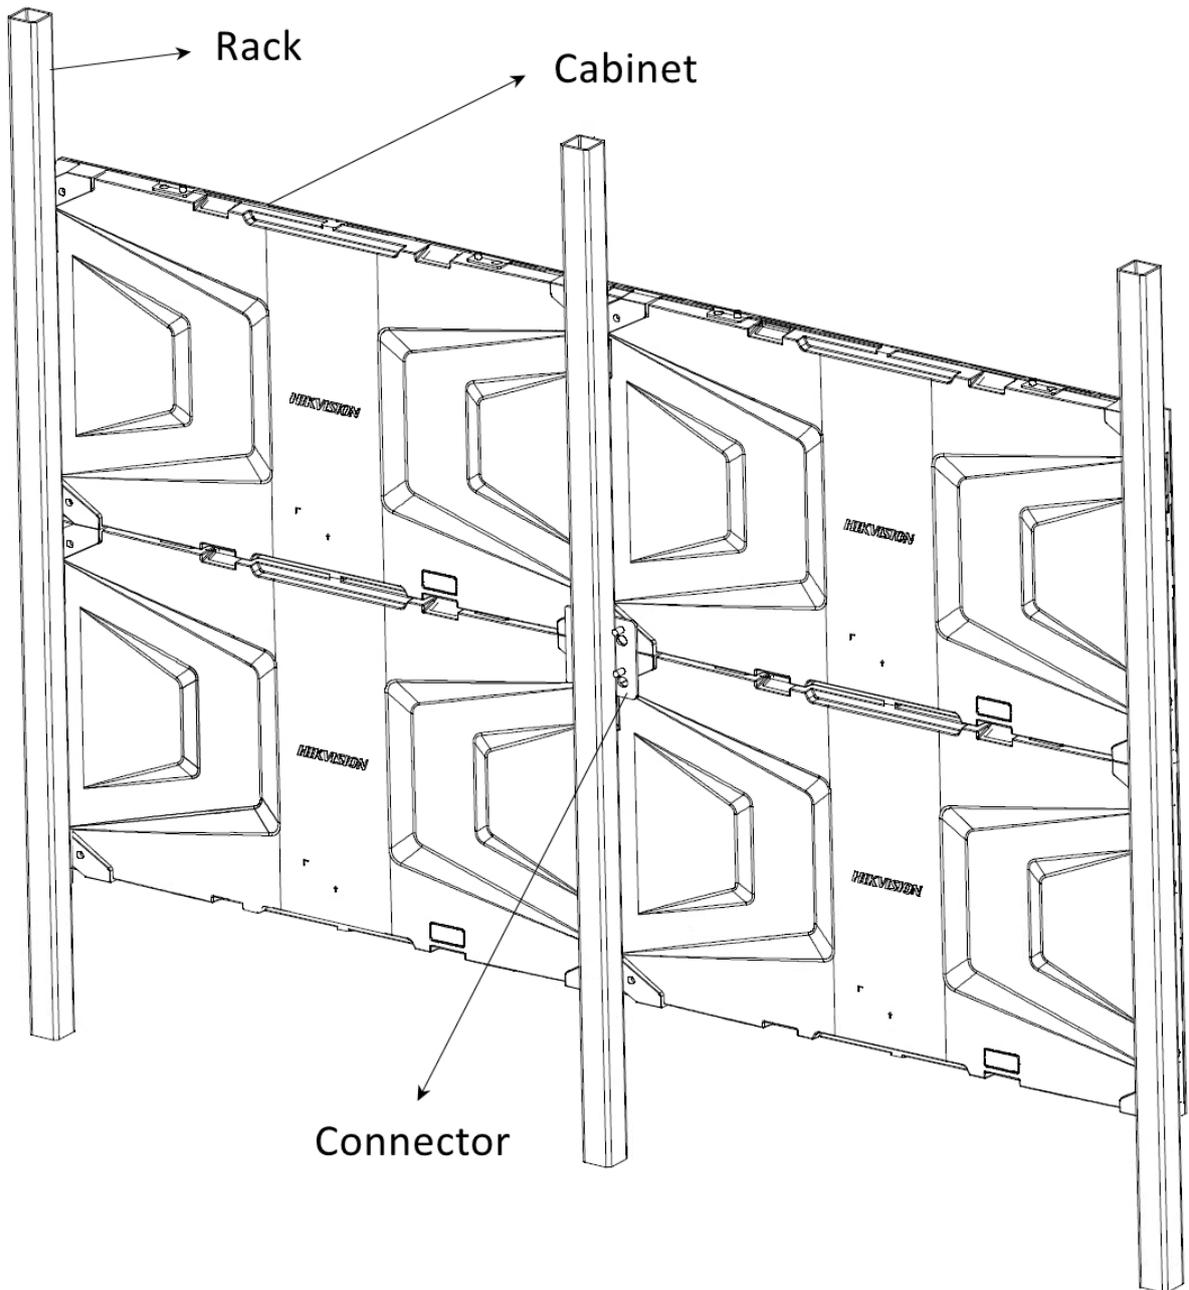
Fix the Cabinet, Connector and Rack (Rear View)
